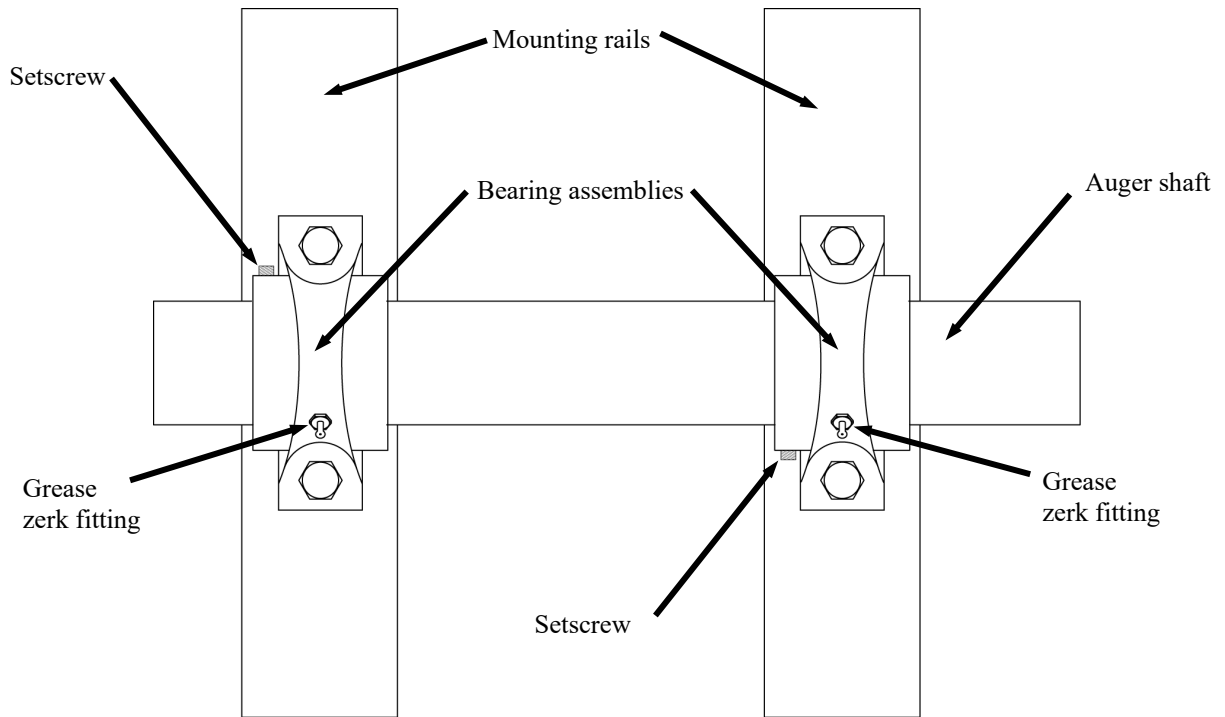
Bearing Setscrews, 180° Out-Of-Phase
